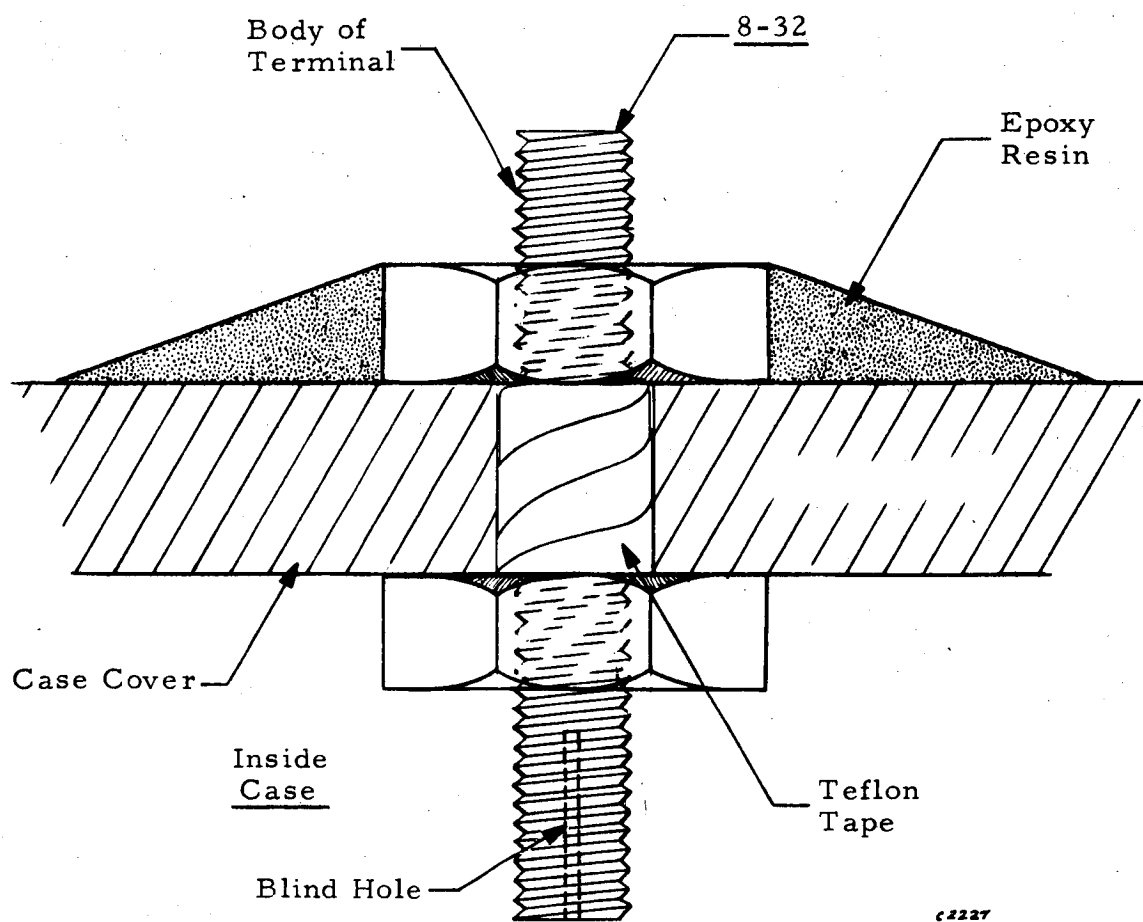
Terminal-to-Cover Seal Assembly – Model #1
